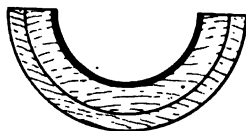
Lining up the Bore of a Brass Bearing with Sheet Lead.
